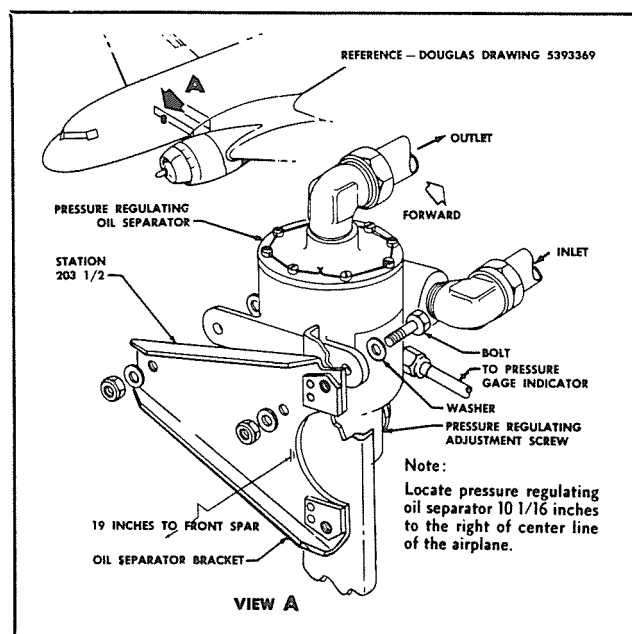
Surface De-Icer Pressure Regulator Oil Separator
